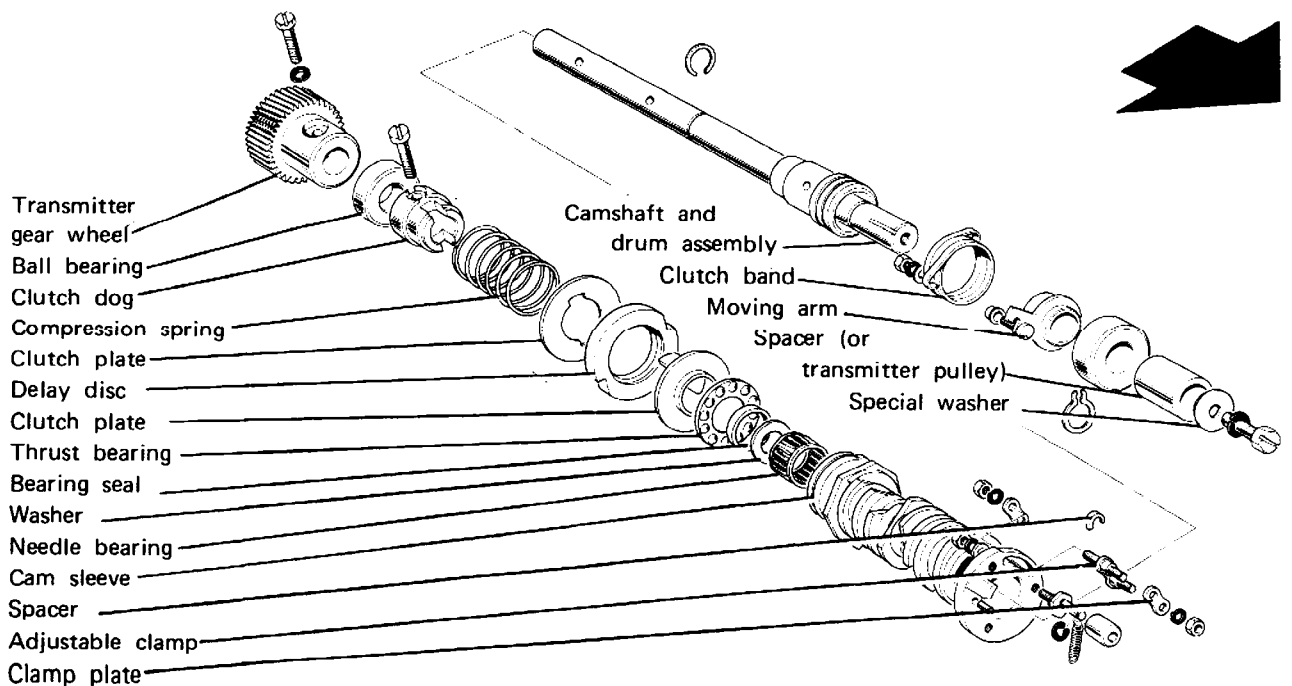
TRANSMITTER CAMSHAFT ASSEMBLY
